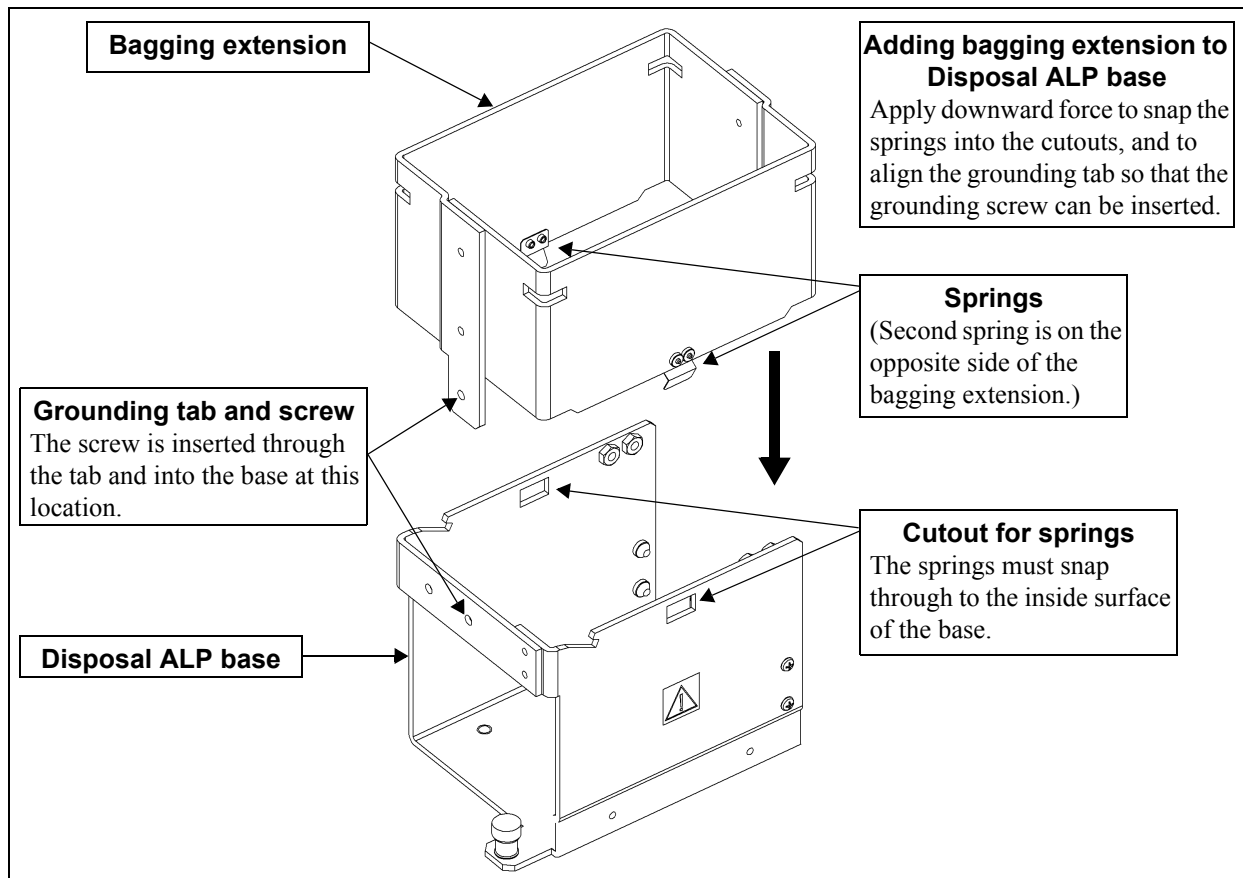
Multichannel Disposal ALP without Slide - exploded
